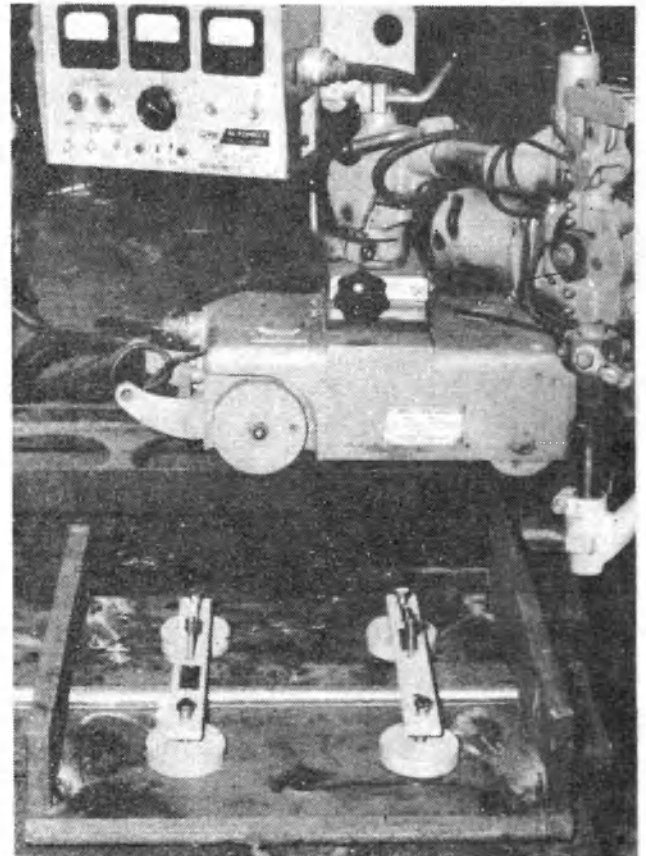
Clamping of FAB at the bottom side of the weldgroove.
